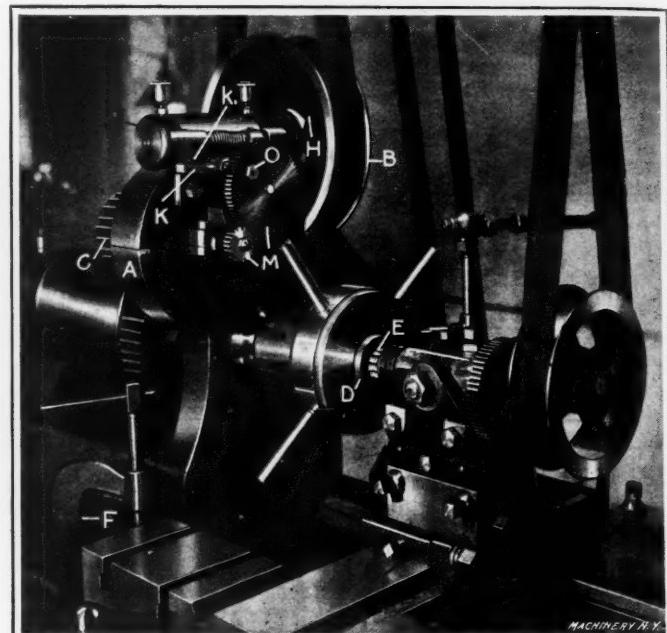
Thread Milling Attachment Designed for Use on Engine Lathe
